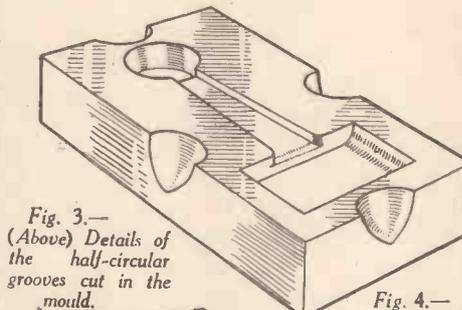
(Above) Details of the half-circular grooves cut in the mould.
